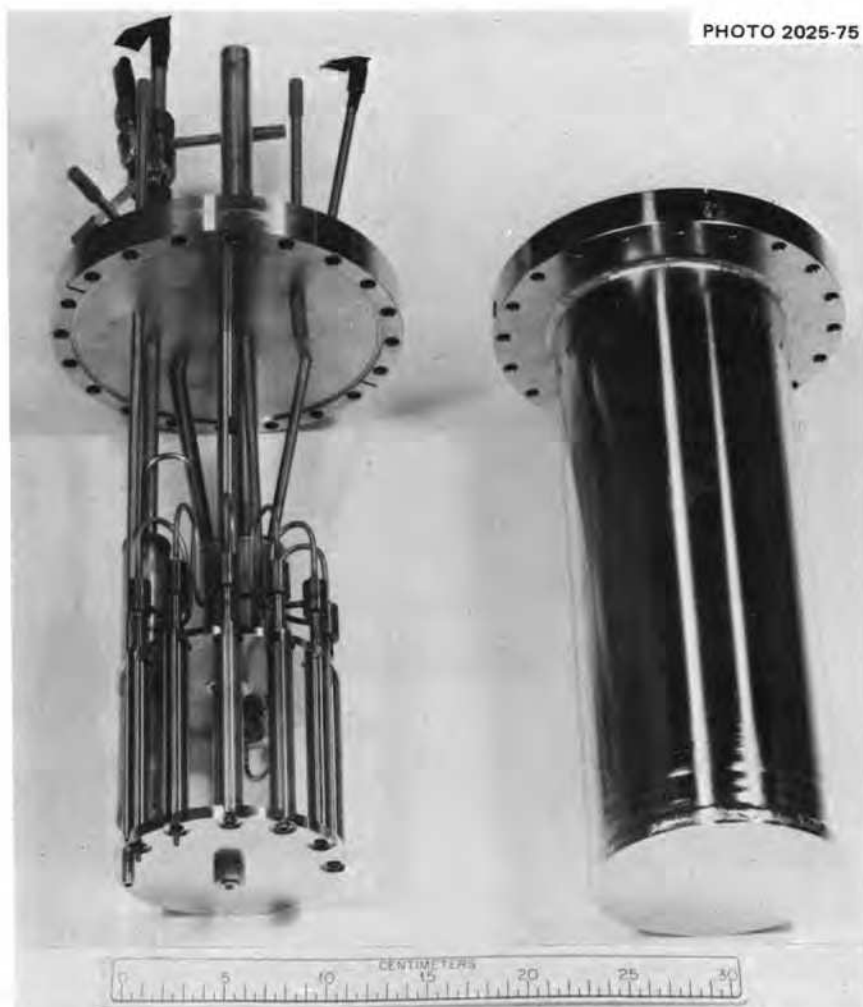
Salt fill vessel showing outside portion on right and assembled internal assembly on left. All joints are welded in the lines connecting the small vessels and the fuel pins.
